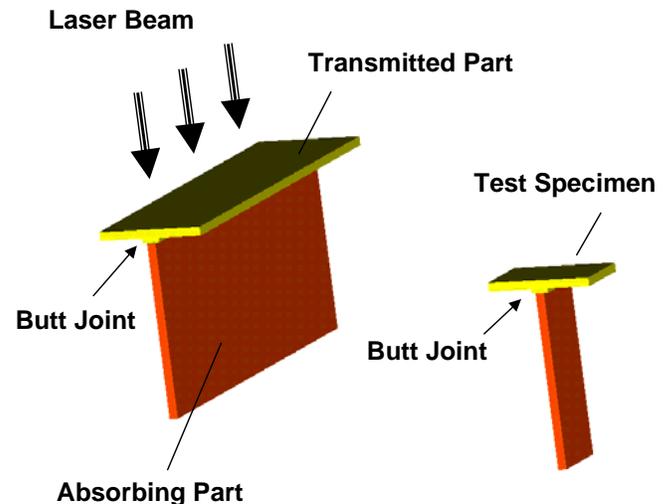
T-type joint for the laser transmission welding (LTW)
